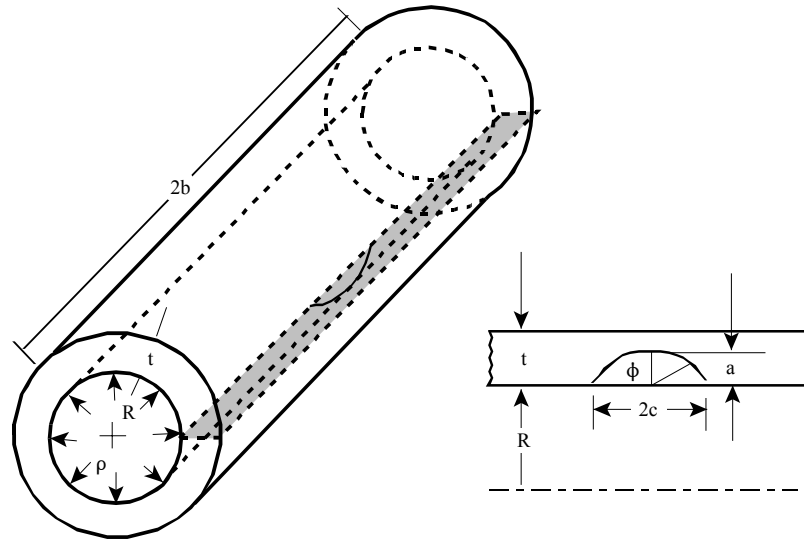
Typical Surface Crack in Cylinder Sidewall
